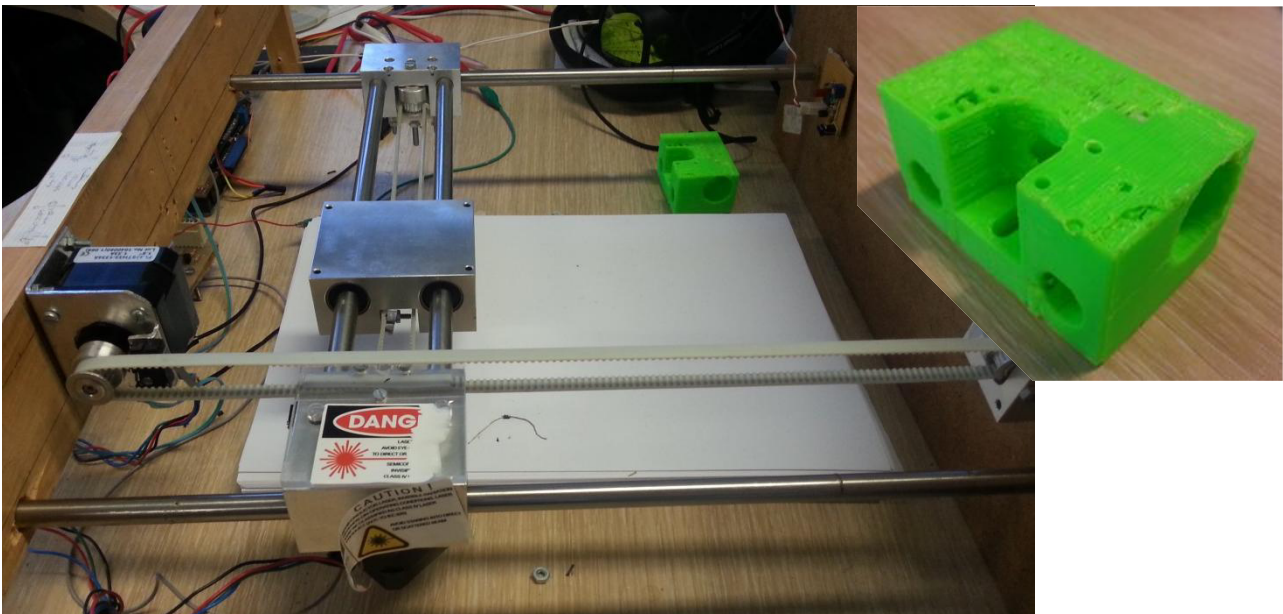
Showing a photograph of the gantry (LEFT) and a 3-dimensionally printed part (TOP RIGHT).
